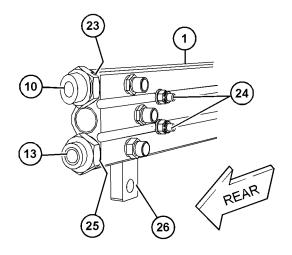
g06010119 Front and rear sections of engine oil rail and fuel rail
